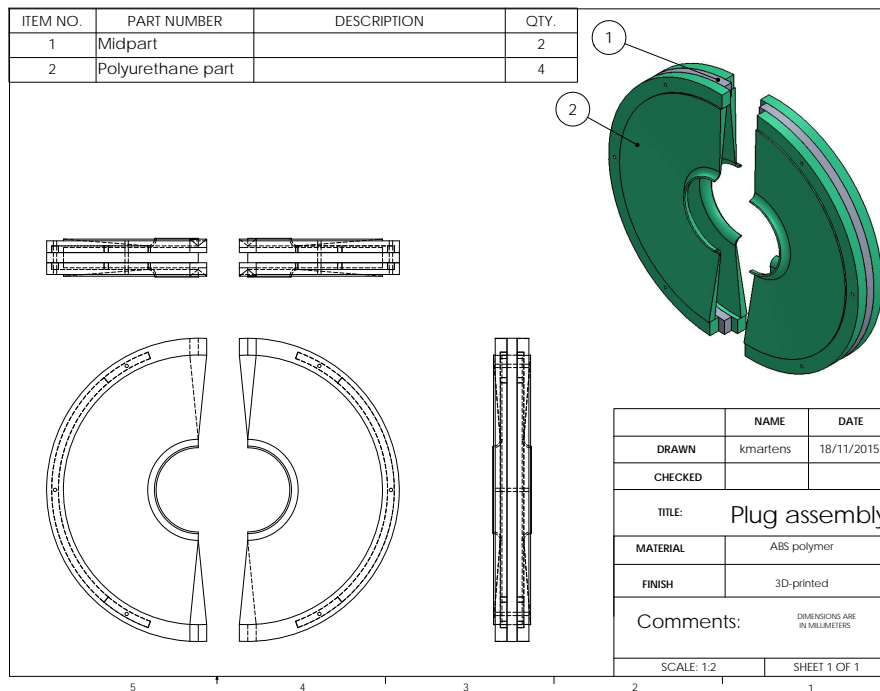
Drawing of the assembly of the polymer part and the middle part into a complete plug
